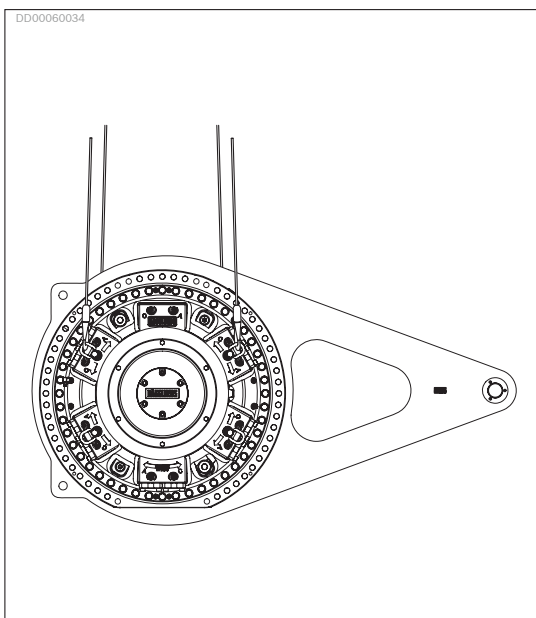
Lifting CBM 2000-4000 and single ended torque arm
